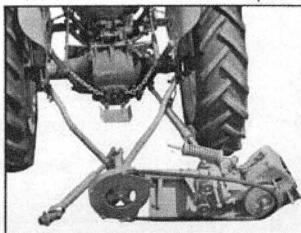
Attach Lower/Stratstractorclub.conFig. 33 Hook Struts on Stabilizer Pins
